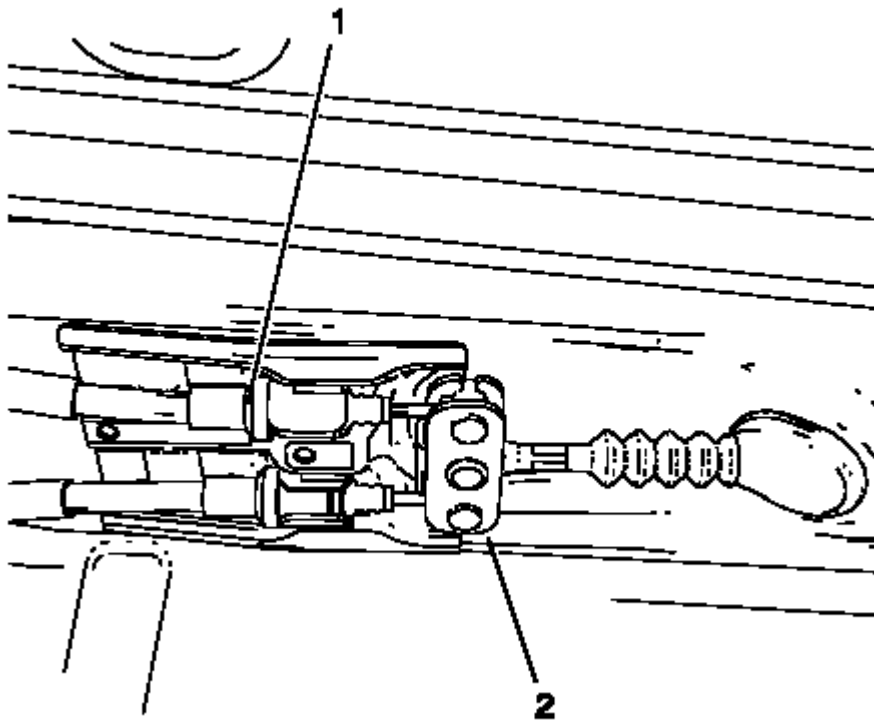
Left And Right Parking Brake Cables And Cable Equalizer
